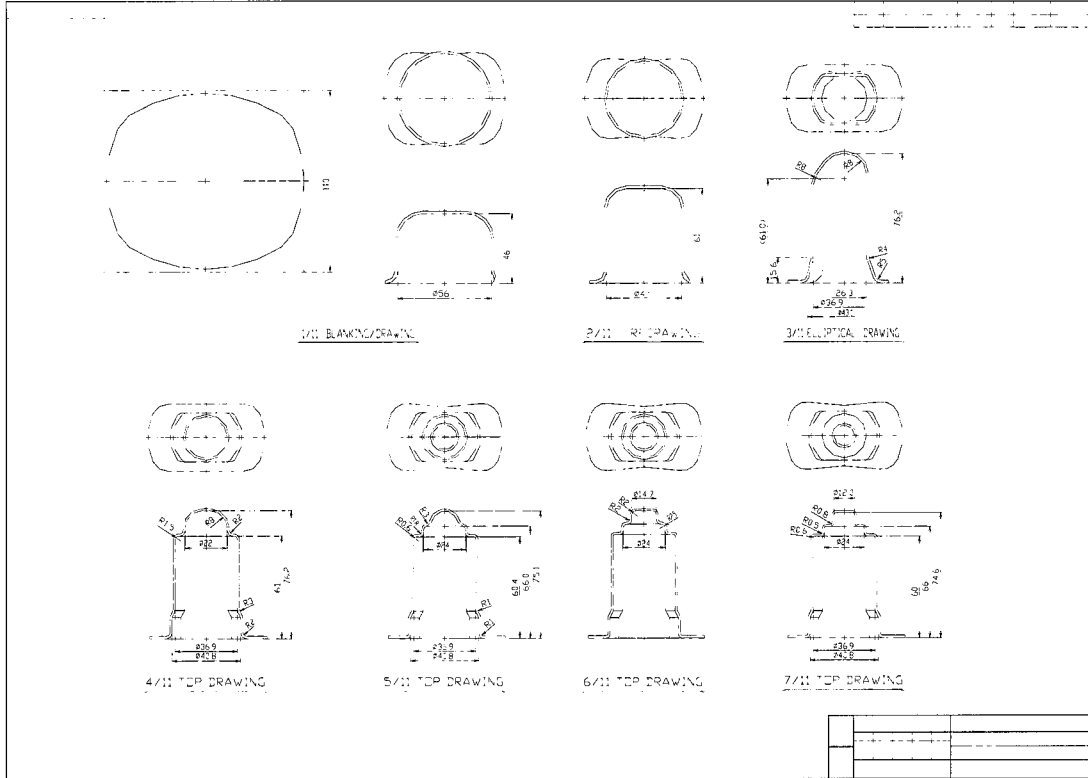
Sequence drawing for the deep drawing product of the "Motor Frame"-Industrial practice
